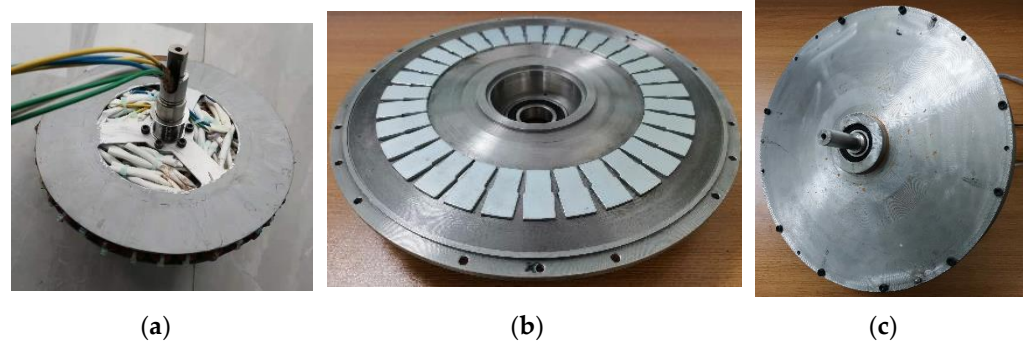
YASA machine assembly: (a) stator; (b) rotor; (c) machine assembly.
